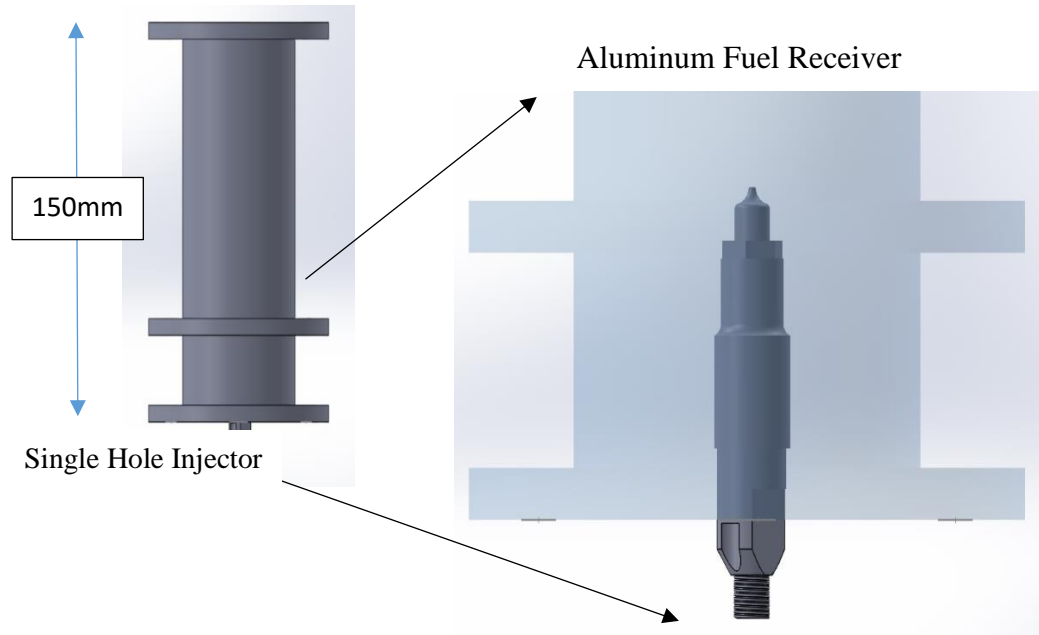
Close-up of the Single Hole 0.213 mm hole Delphi Injector inside the 150 mm long Aluminum Fuel receiver
